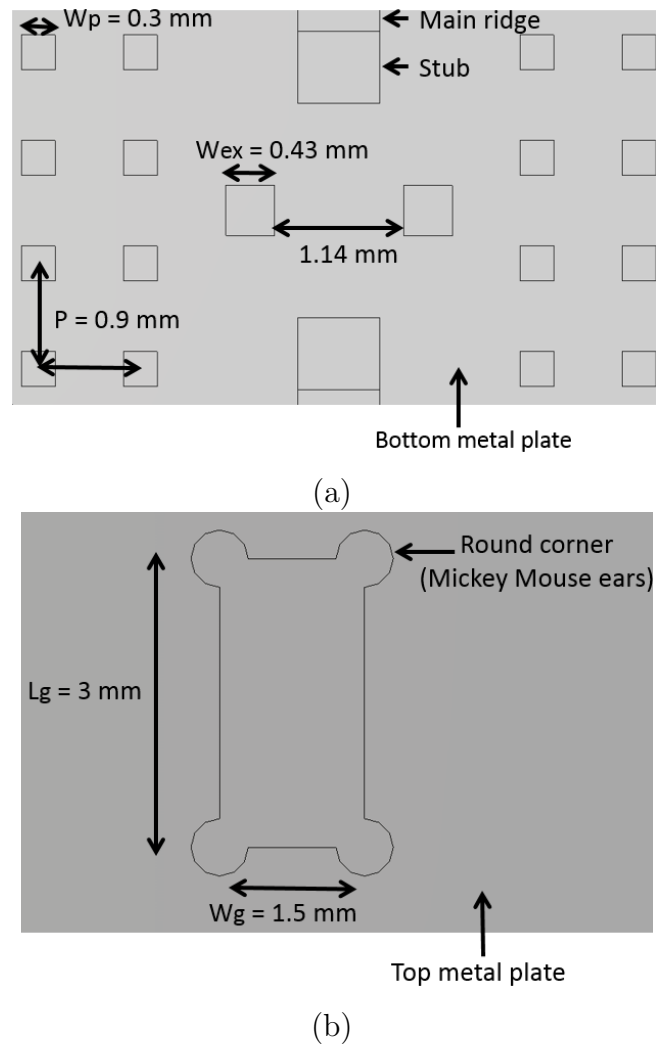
(a) (Bottom view) Changes in the pins sizes and the two extra pins used instead of four pins, b) (Top view) Top metal plate with the groove for PCB alignment
